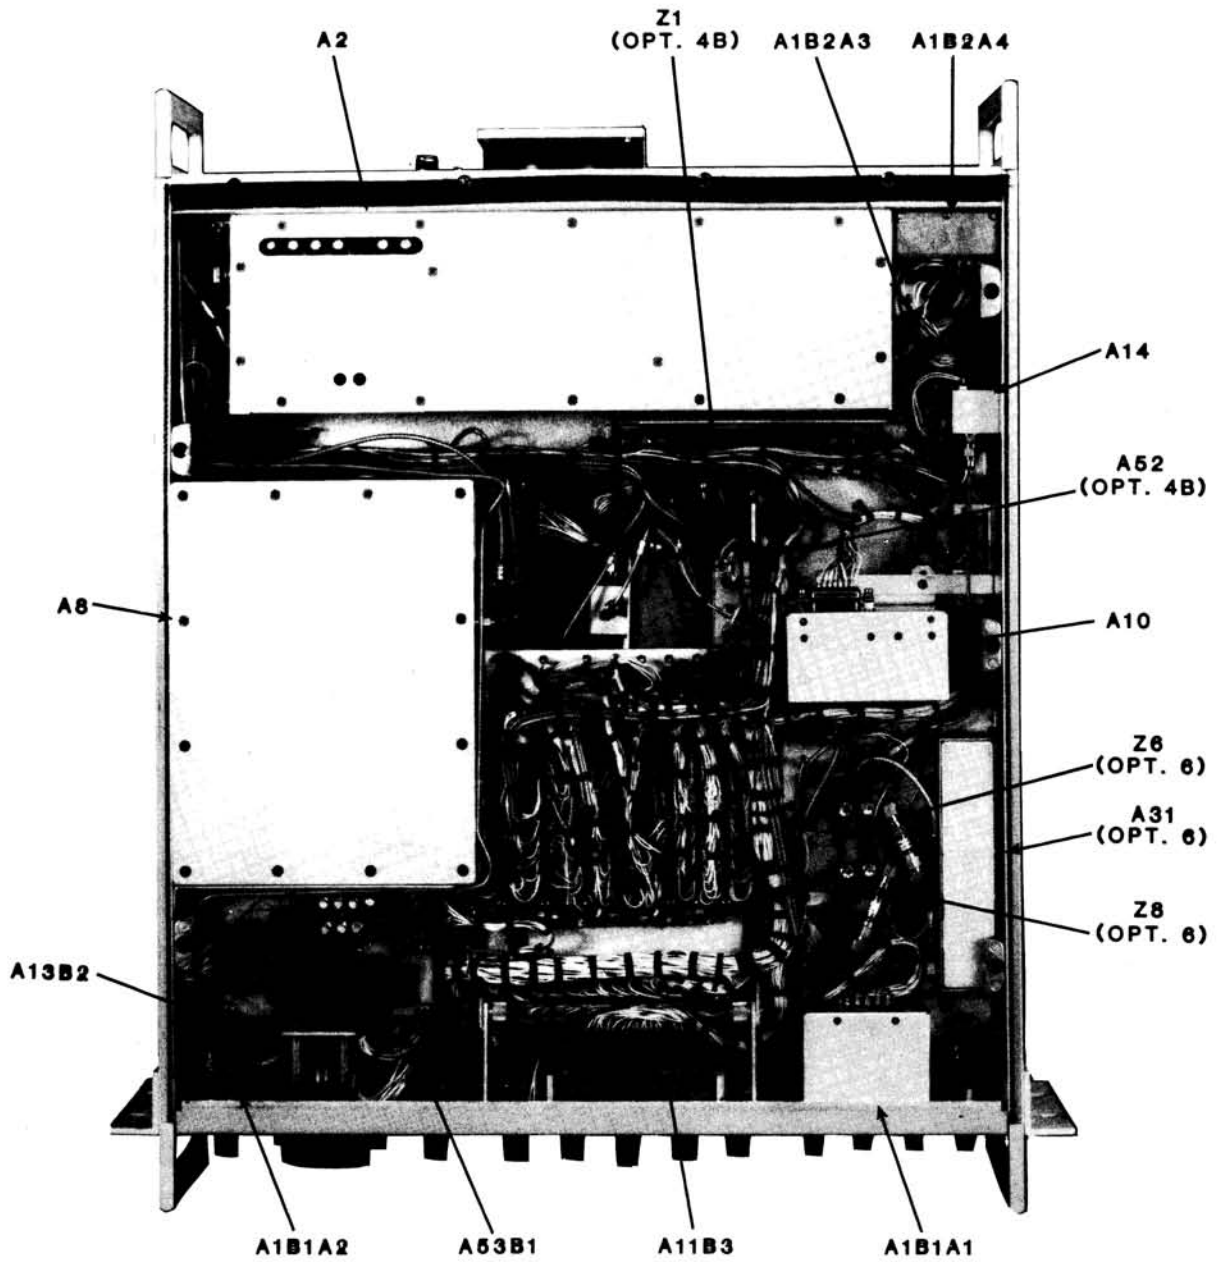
MSR-904A, BOTTOM VIEW
